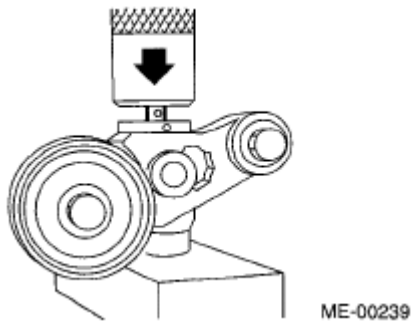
Attaching Automatic Belt Tension Adjuster Assembly To Vertical Pressing Tool
